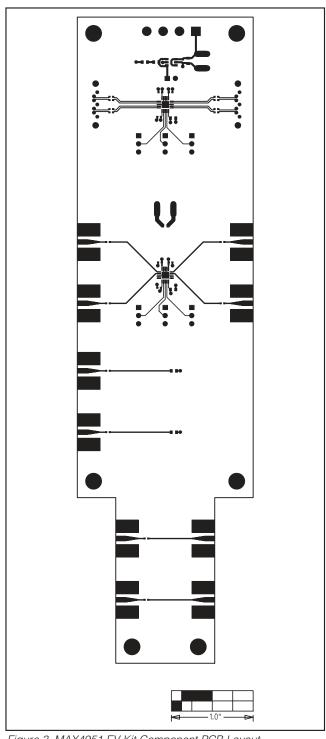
MAX4951 EV Kit Component PCB Layout—Component Side
